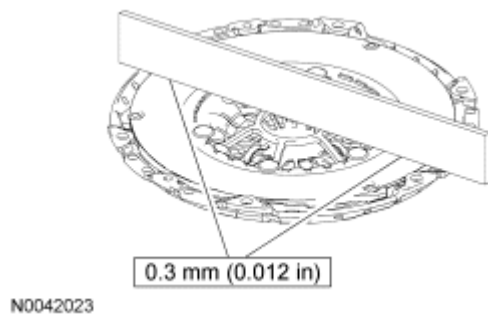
Measuring Flatness Of Clutch Pressure Plate Surface With Straightedge And Feeler Gauge
